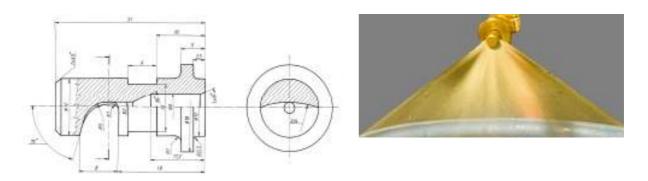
Technical drawing and spraying pattern of the large spraying angle nozzle (type K–2/75 surface striking)
